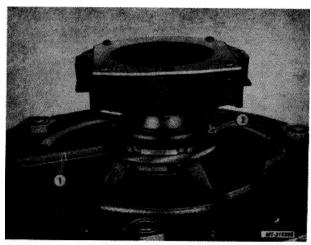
Pawl Block Tool in Position. (Clutch Removed from Vehicle for Illustration)
